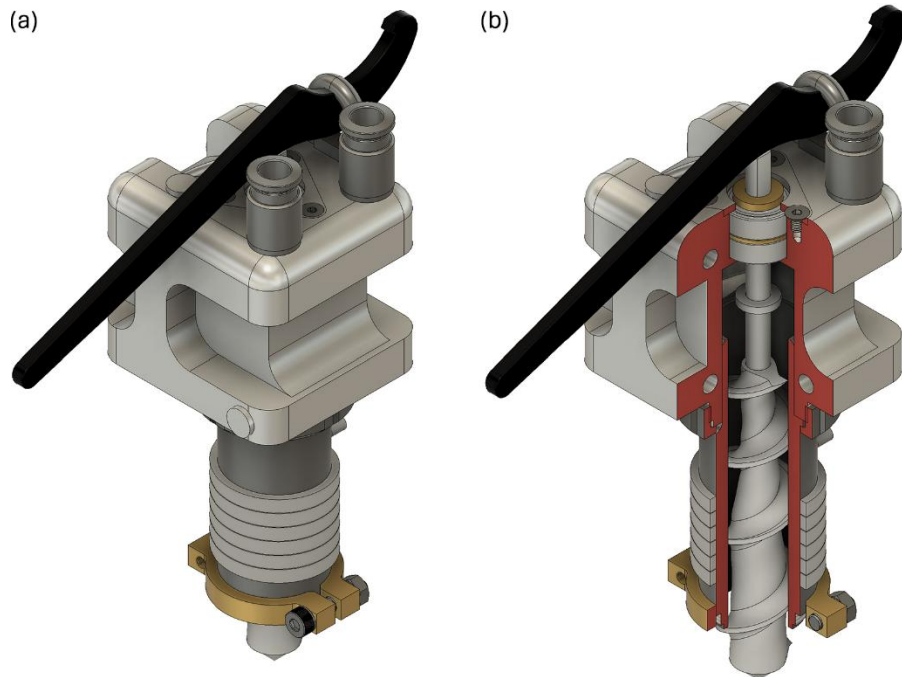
Extruder with a c-spanner acting as a lever (a) and sectioned (b).
